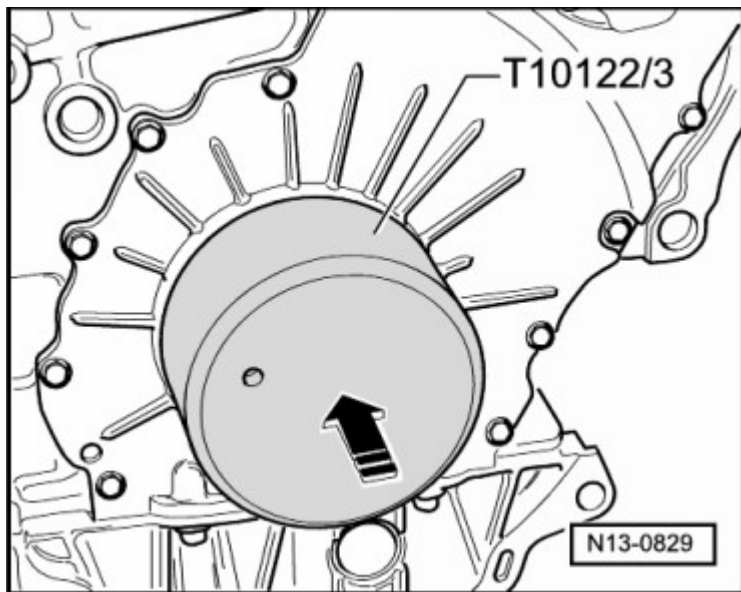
Driving Seal Into Sealing Flange Until Stop Using Thrust Piece T10122/3
